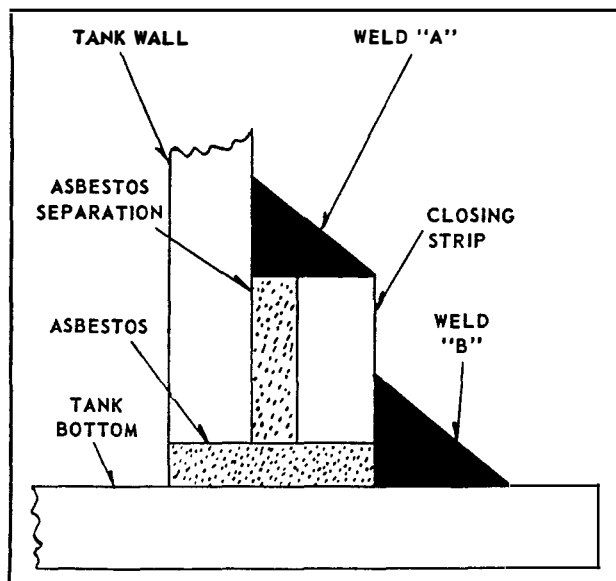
Weld between Tank Wall and Tank Bottom
